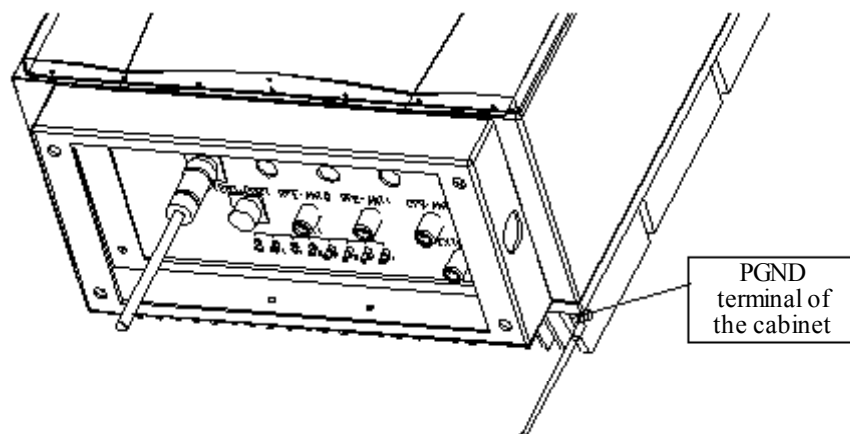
Connection of Power Cable and PGND Cable at the Bottom of a Cabinet
